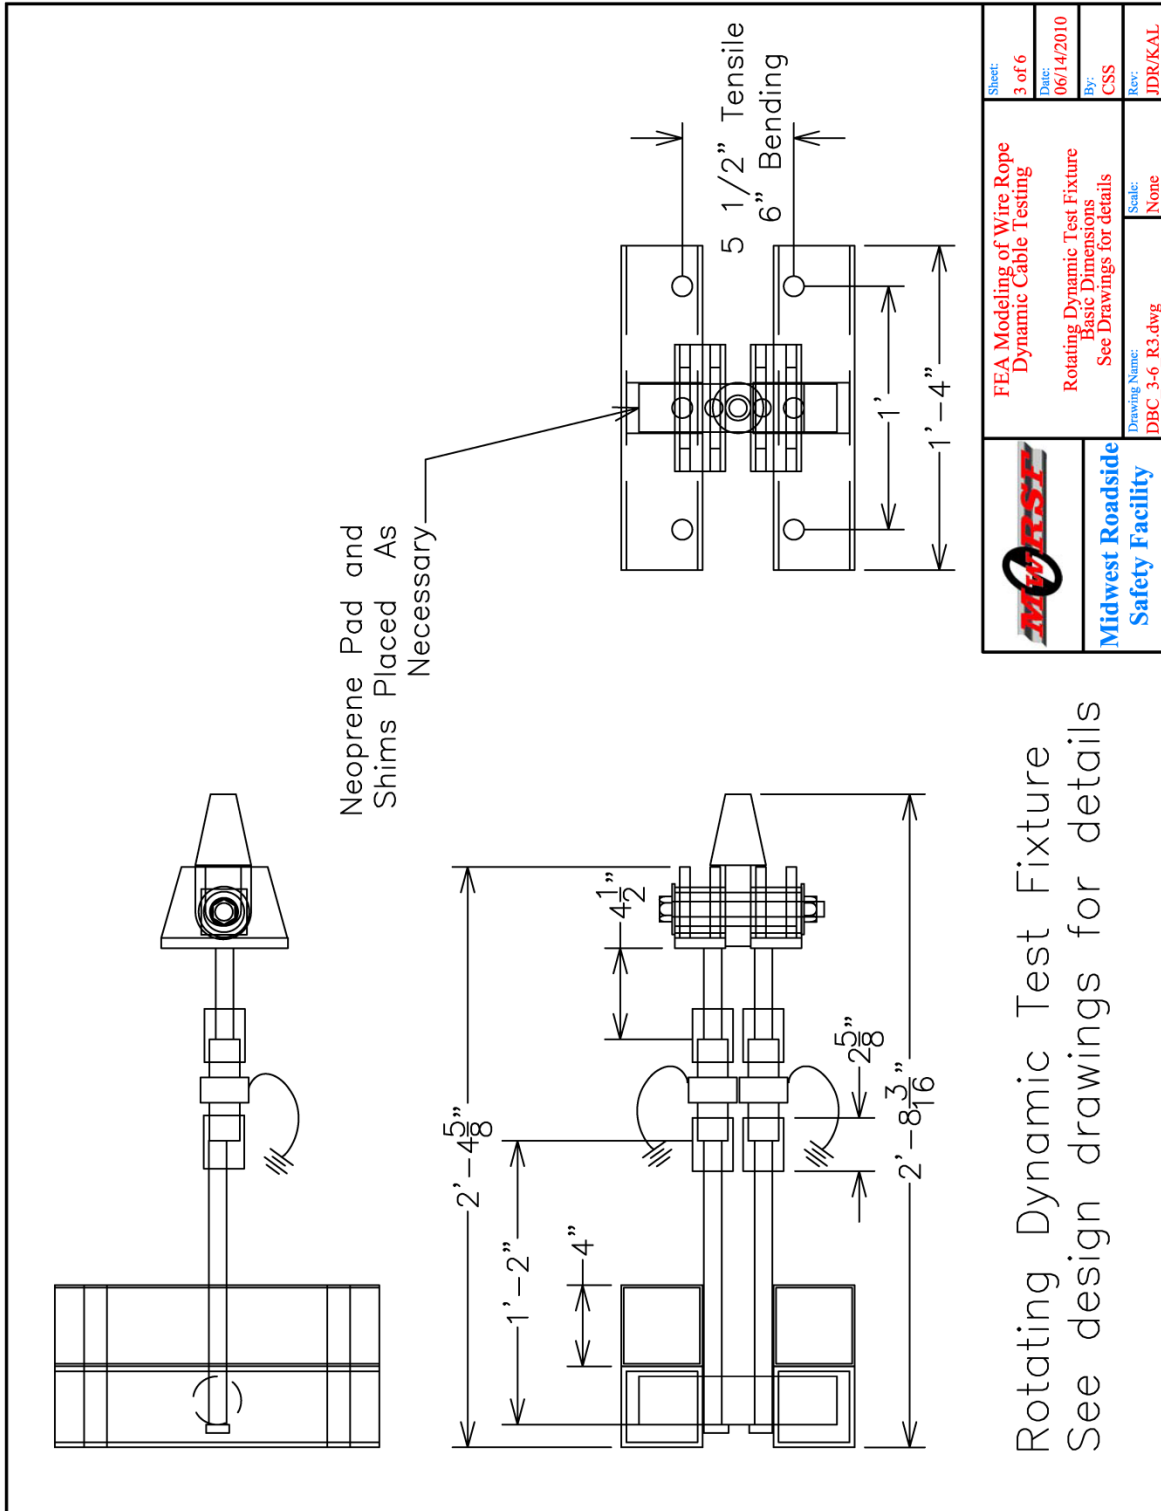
Load Frame and Rotator Pipe End Assembly Details, Test Nos. DBC-1 through DBC-6
